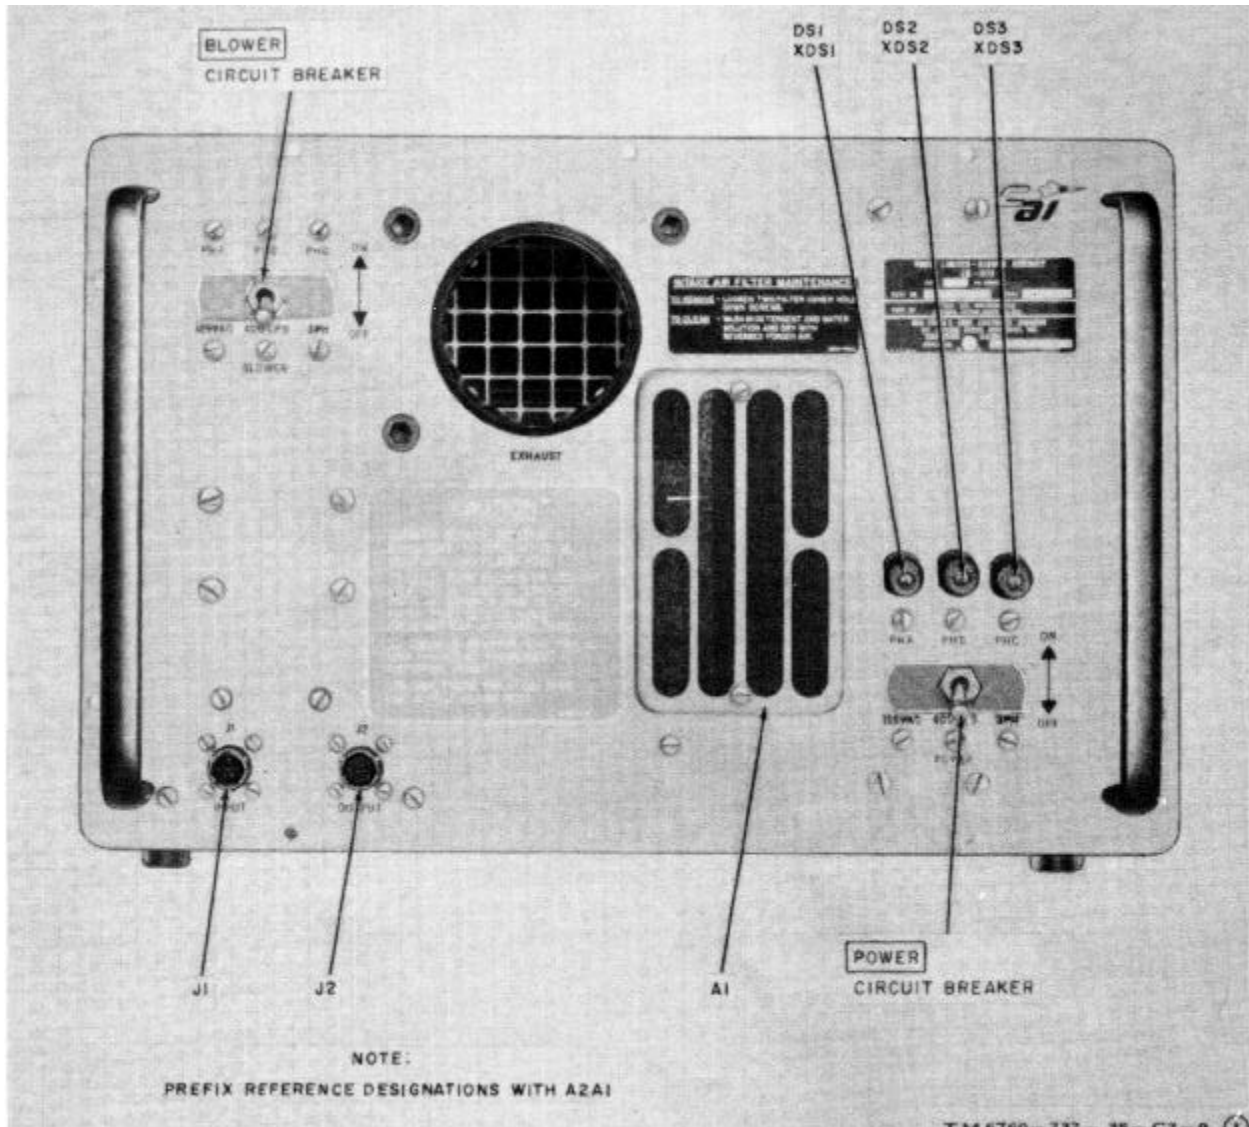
(1). Power limiter and blower, panel and component assembly A2A1 (sheet 1 of 2).
